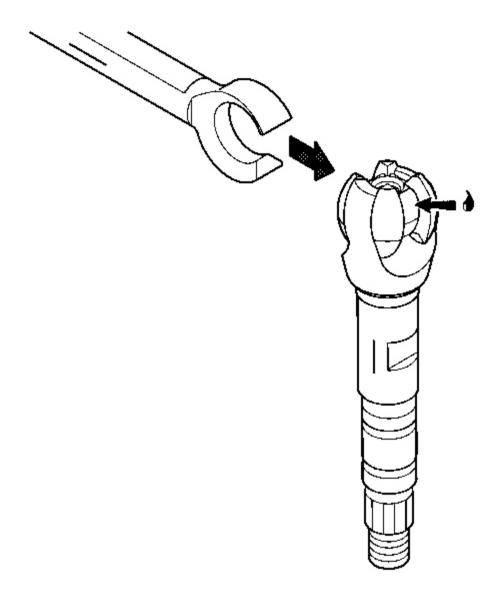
Installing Race & Upper Shaft Assembly Courtesy of GENERAL MOTORS CORP.
